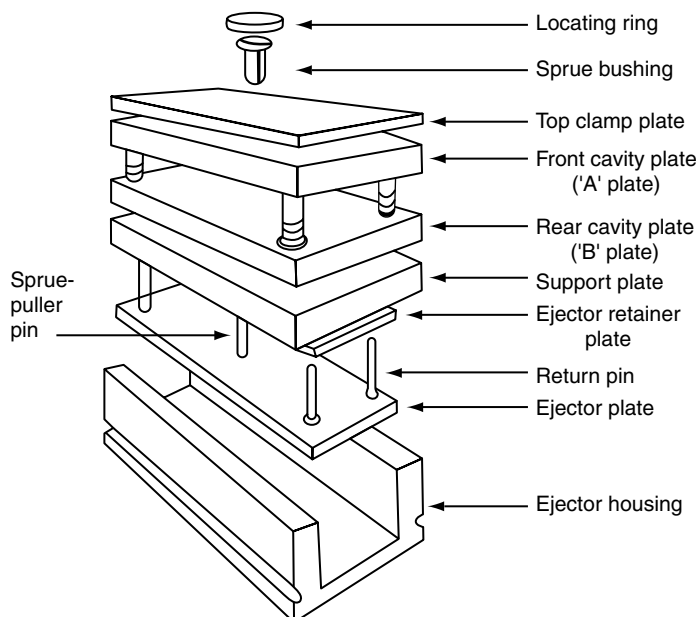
Exploded view of a standard mold base showing component parts.
